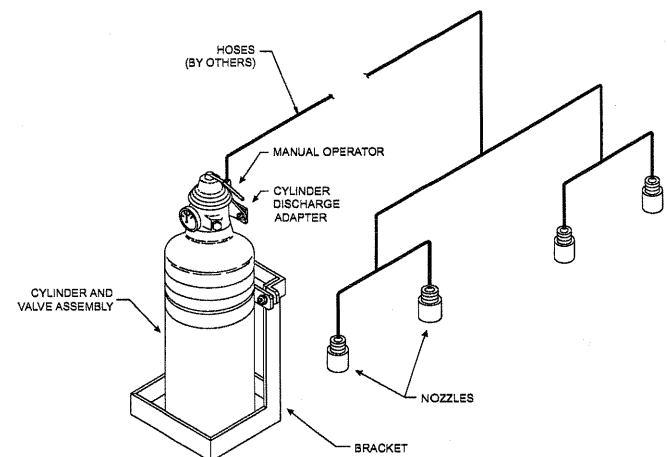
Off-road Fire Protection System With Dry-chemical Cylinder and Valve Assembly and Local Manual, Mechanical Actuation
